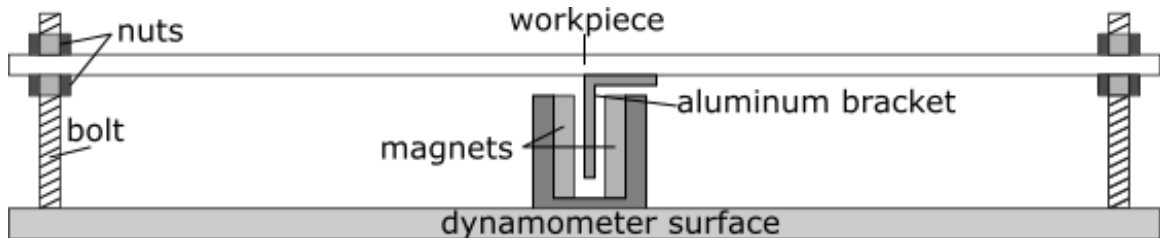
Experimental setup for eddy current damping testing on thin plate machining
